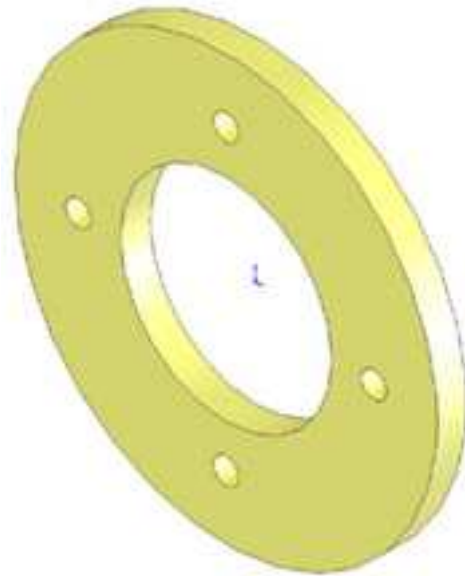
Accelerator insulator polyethylene ring. Dimensions are shown on technical drawings and given in appendix B with Part number 12
